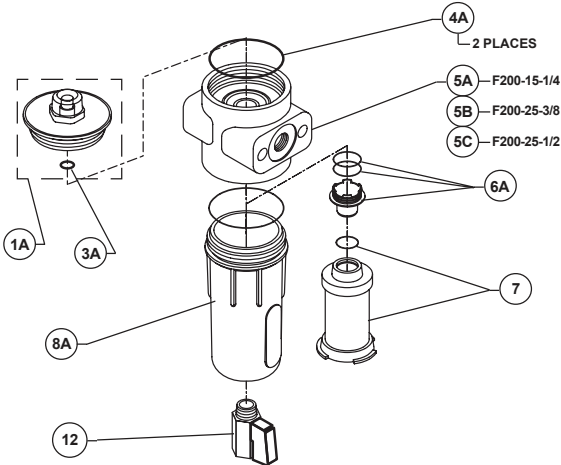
B F200-55-1/2 THRU 500-2 REPLACEMENT PARTS
